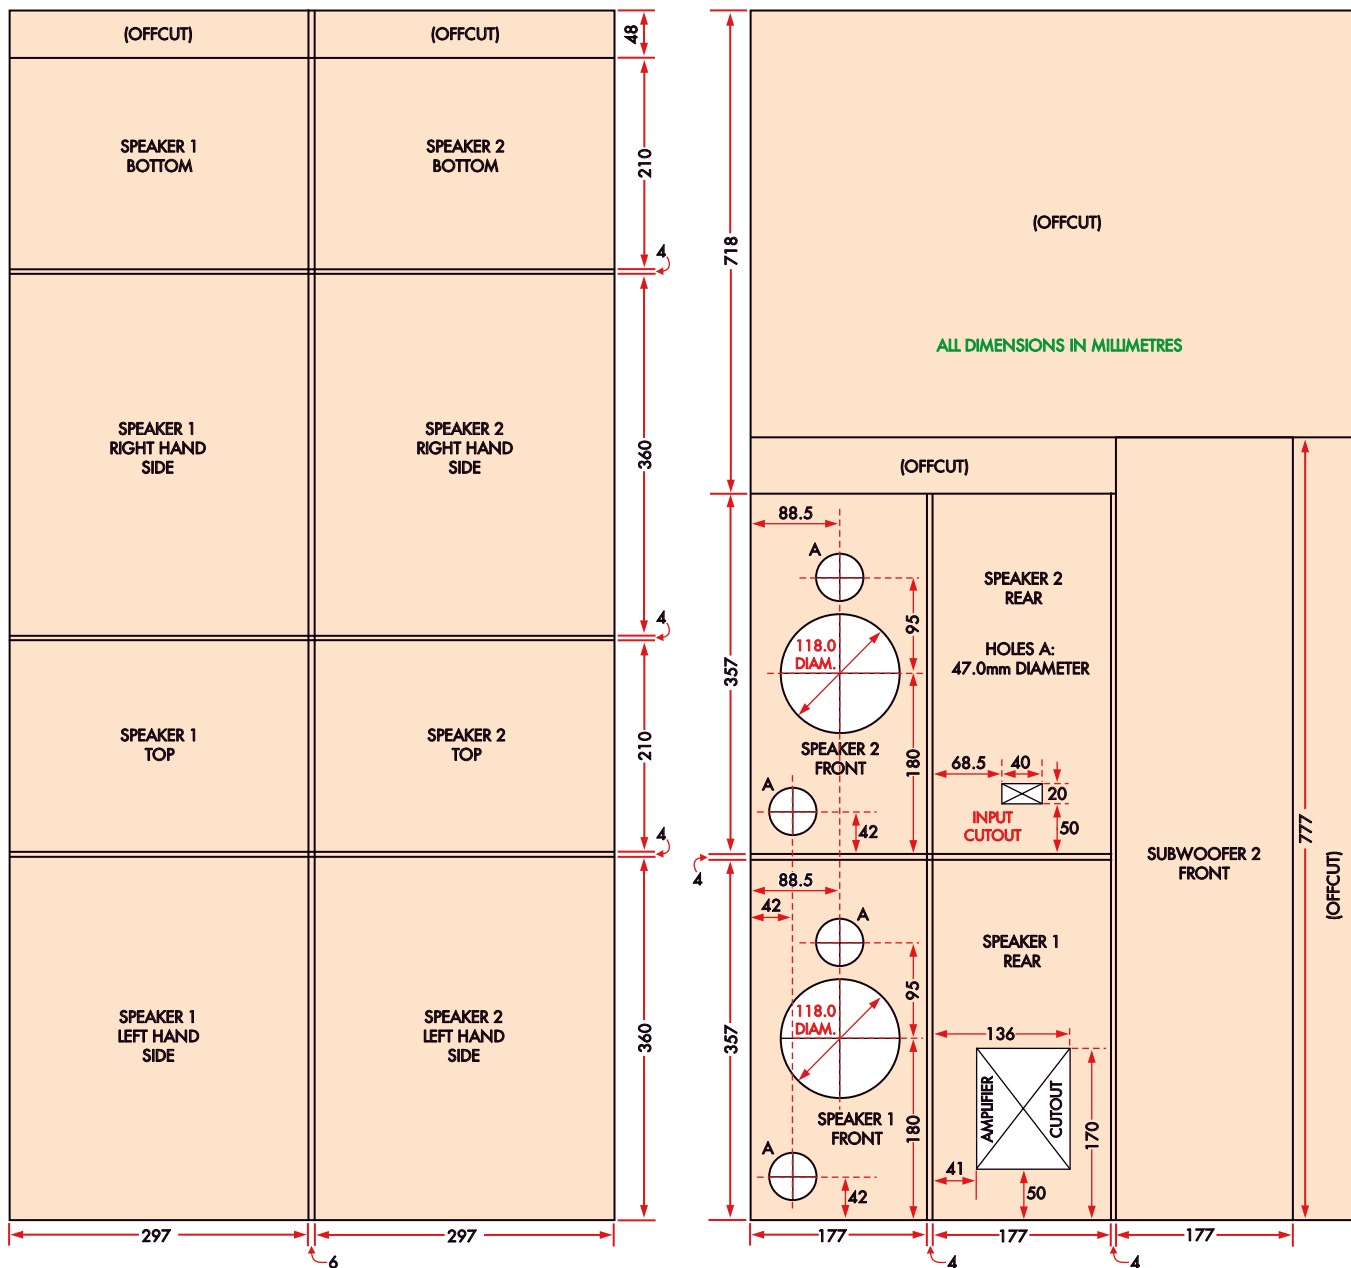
here's how to cut two 600 x 1200mm sheets of 15mm ply into the pieces you'll need to build two monitor speakers, plus one piece for the optional subwoofers. The dimensions have been chosen to minimise waste; depending on the width of your saw, you may be able to simply cut the left-hand sheet in half down the middle. The holes for the driver, port and terminals are best made once the boxes have been assembled.
